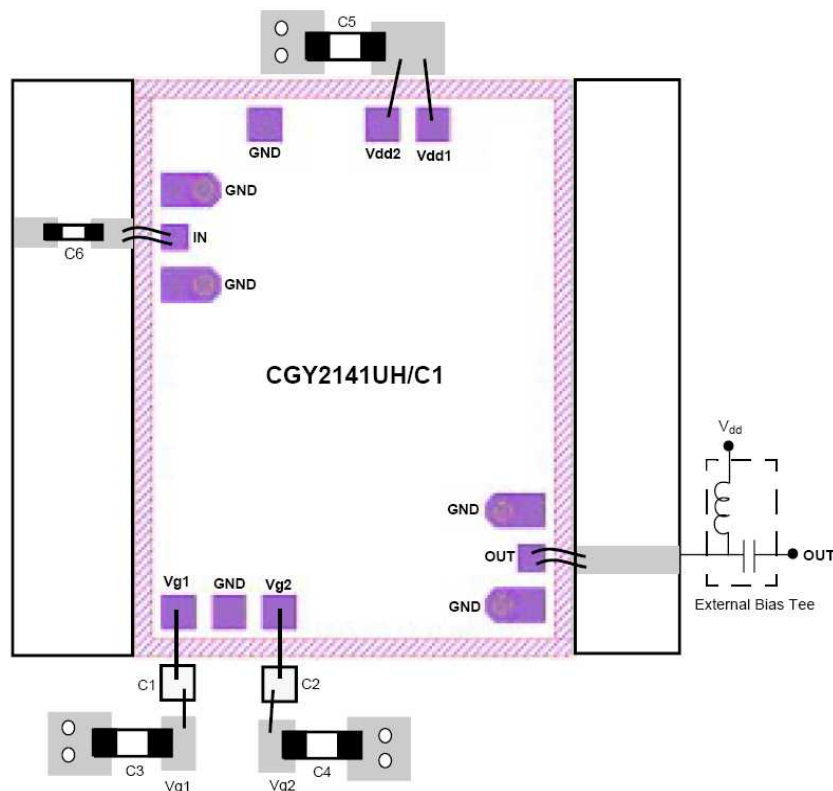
CGY2141UH/C1 module layout : microstrip assembly
